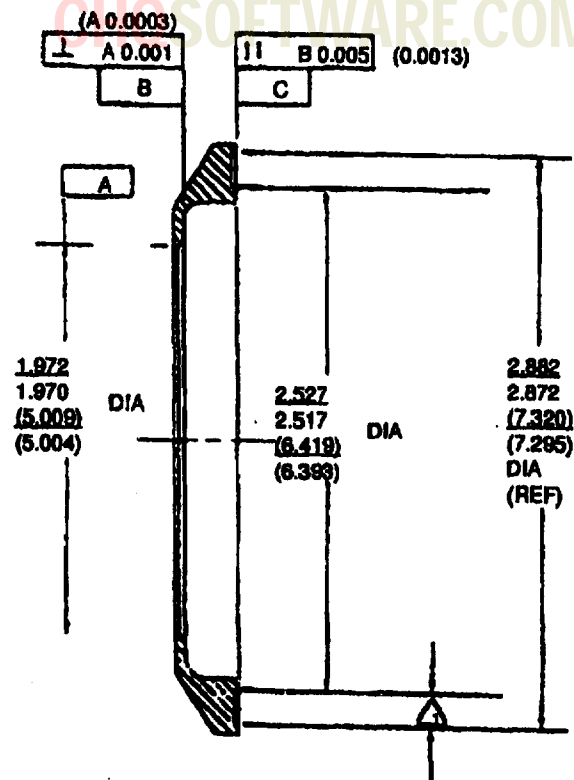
Compressor Rotor Assembly Dimensional Inspection Locations (T53-L-13B, -701A, -703)
